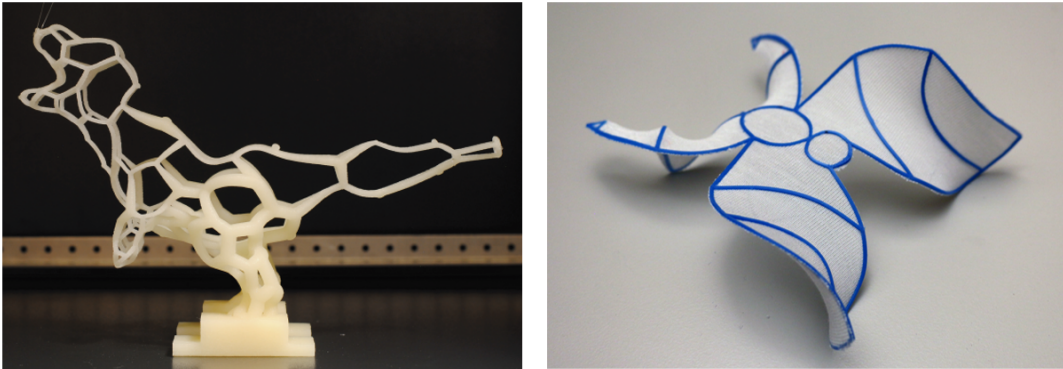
In this thesis, we explore the computational design and fabrication of two instances of elastic rod assemblies: flexible rod meshes (left) and Kirchhoff-Plateau surfaces (right).
